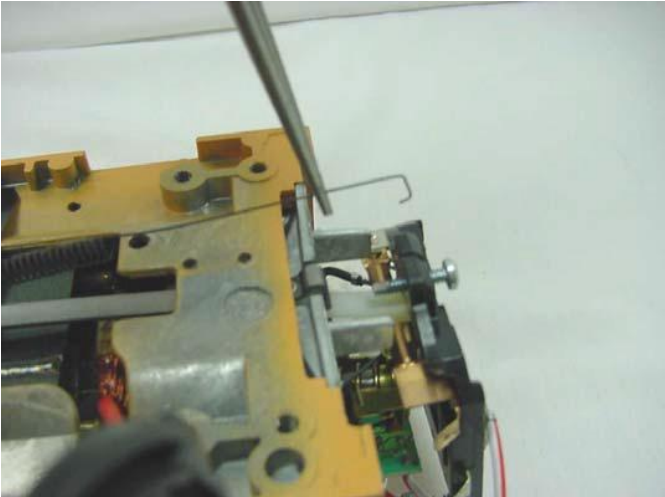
Remove the motor stator flag terminals (red & white wires) from the control board.
